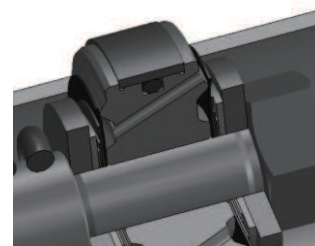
Valve plate structure for pressure control valve with a built-in test damper
